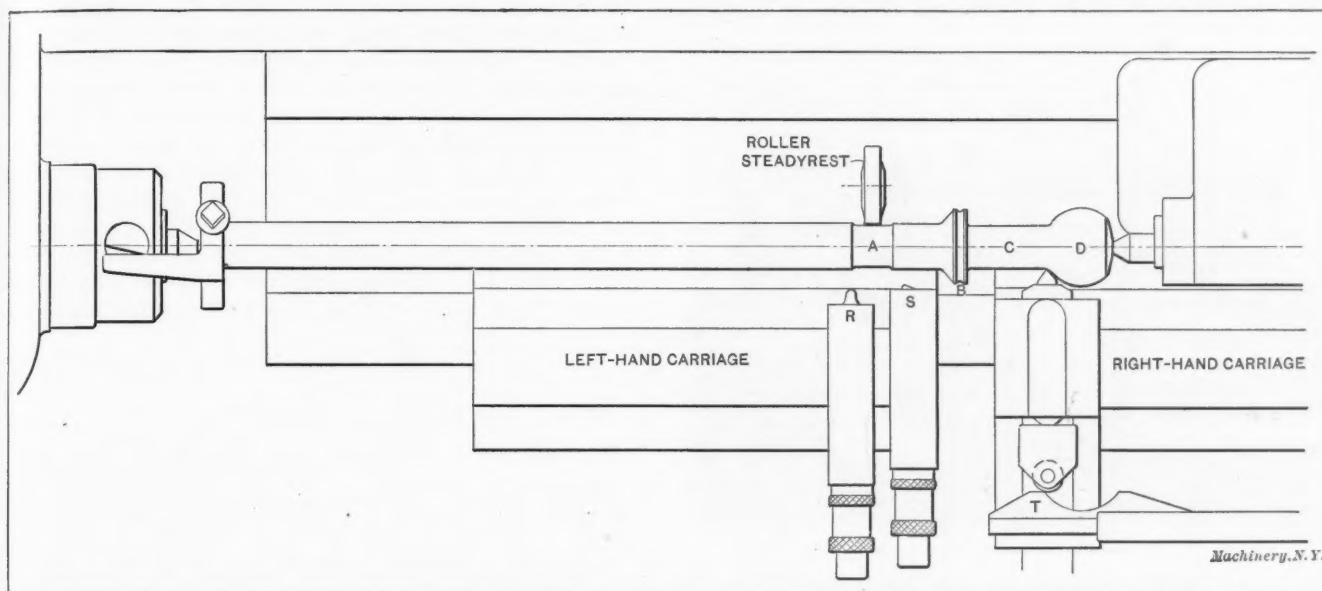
Diagrammatical View showing Tools and Spherical Turning Attachment used in Machining Automobile Propeller Shafts
